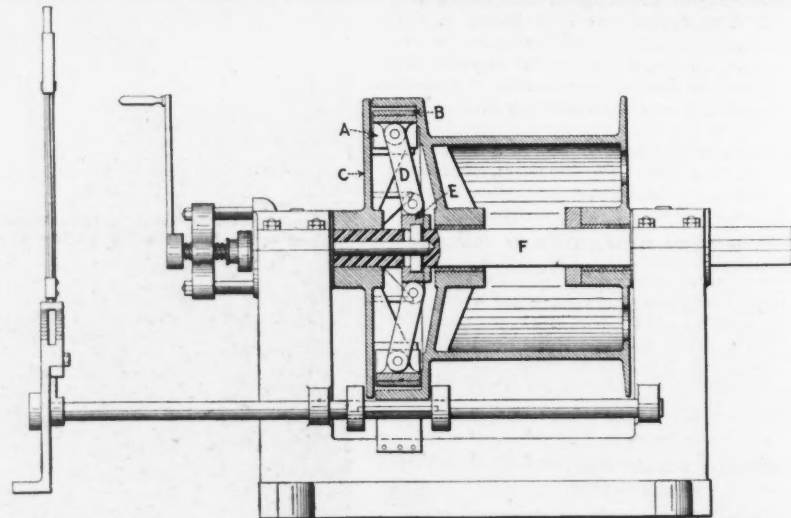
CLUTCH MECHANISM OF WEBER GASOLINE HOISTING ENGINE.
